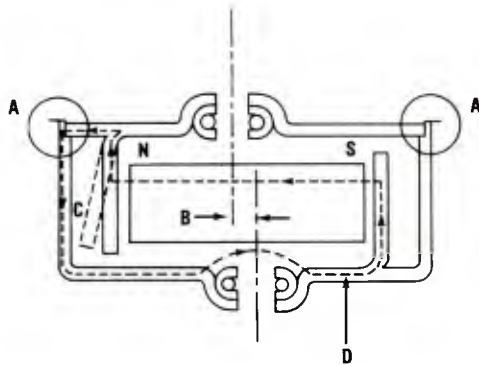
Cross section of stator assembly showing critical interfacing surfaces, alignments, and magnetic flux path.
